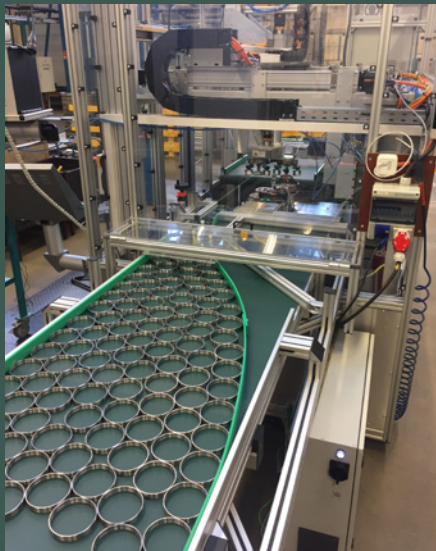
QuaSor E automatic testing machine for grinding burn testing of rolling bearing rings: General view with feed belt. (Source: imq GmbH)
